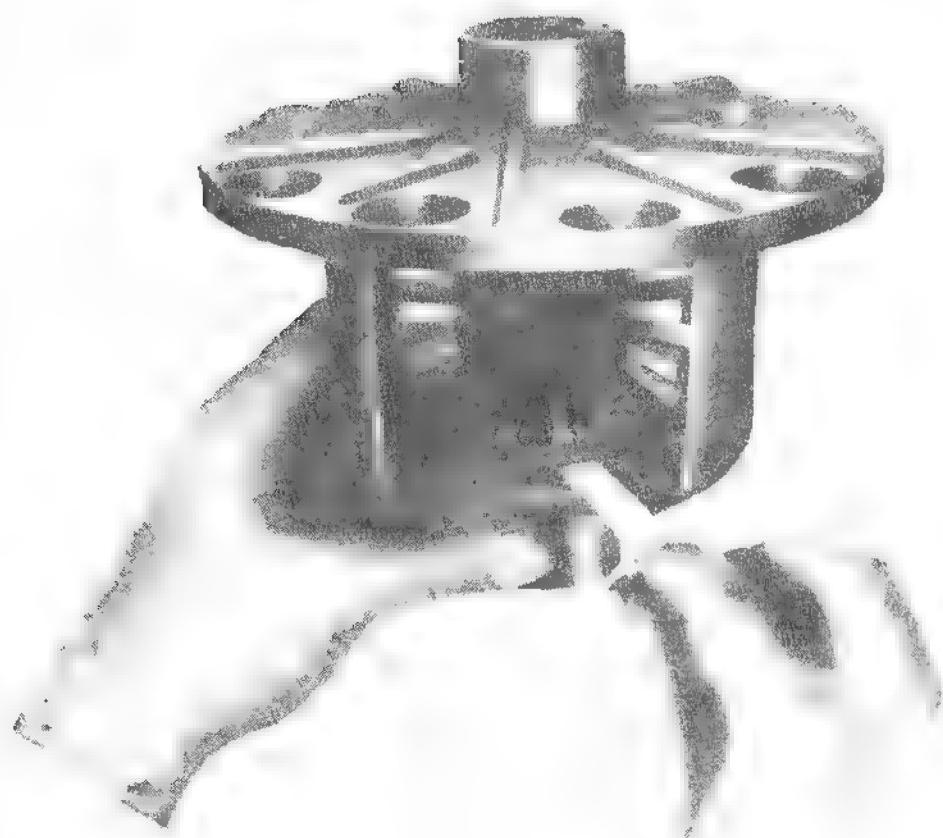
CHECKING DIFFERENTIAL SIDE GEAR AXIAL PLAY
